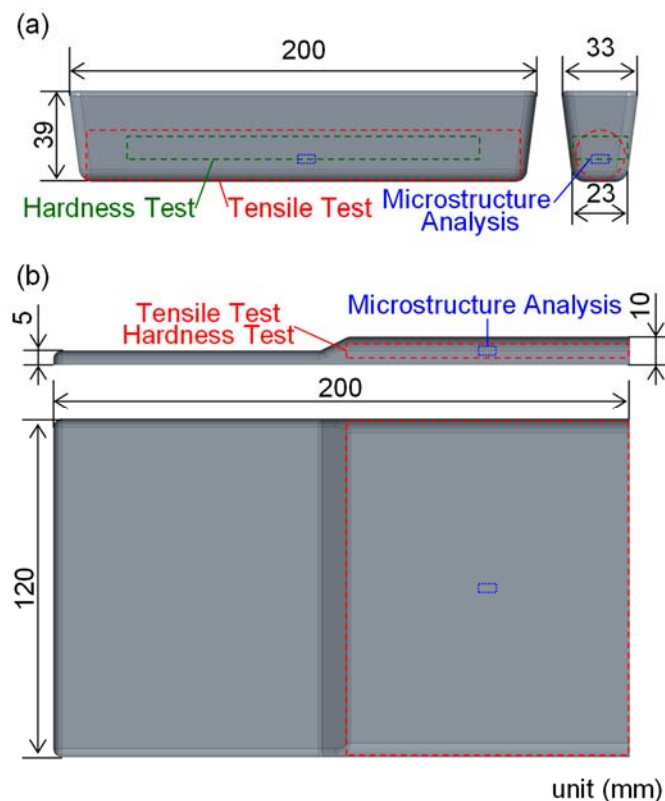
Schematic drawings of samples produced by (a) gravity-casting and (b) die-casting and semi-solid casting processing. Note that sampling positions for microstructure analysis, hardness test, and tensile test are also shown in these schematic drawings.
